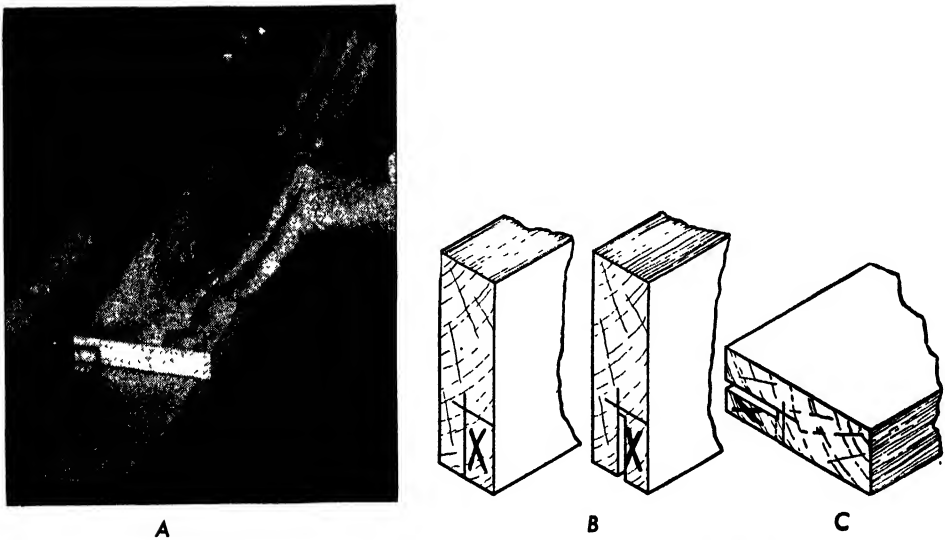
Sawing a rabbet with a circular saw: A, mark the stock to be removed; B, make the first cut with the stock on edge, keeping the cut a little shallow; C, make the second cut with the stock on its side, and with the saw set deep enough to cut clean to the corner.
